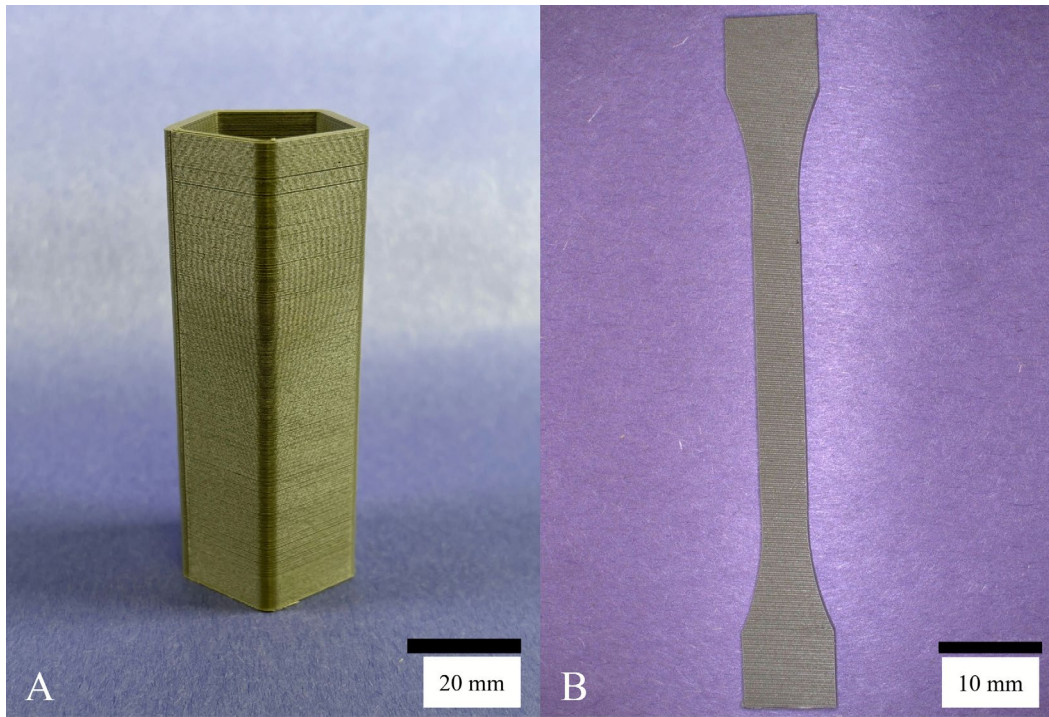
| Specimens were printed as pentagonal towers (A: Si₃N₄-PEKK tower) then machined into ISO 527 1BA [39] tensile specimens (B: Si₃N₄-PEKK tensile specimen).
